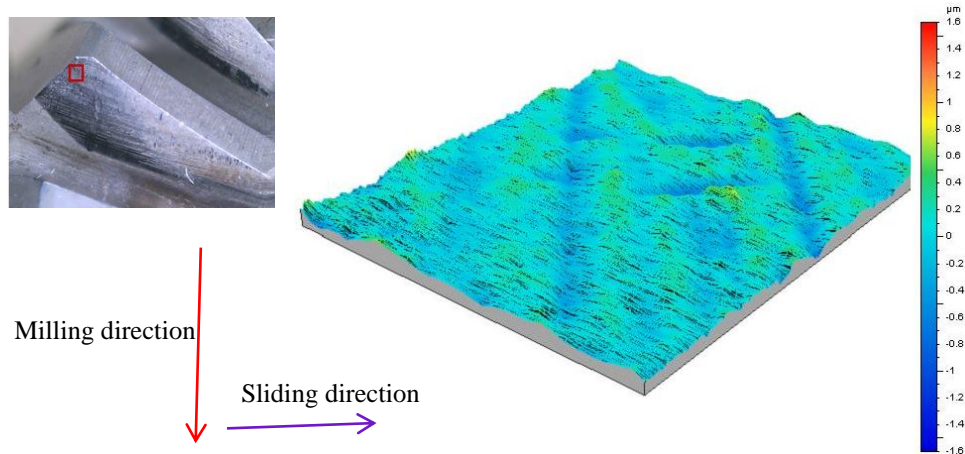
3D measurements of the gear flank after running-in test-set 4
